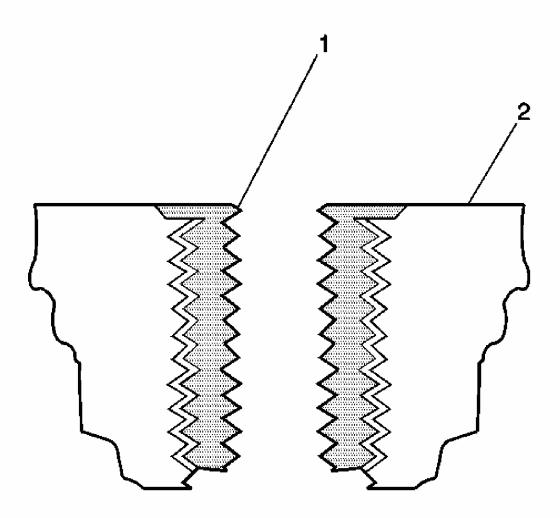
View Of Bushing Type Insert & Base Material Courtesy of GENERAL MOTORS CORP.
